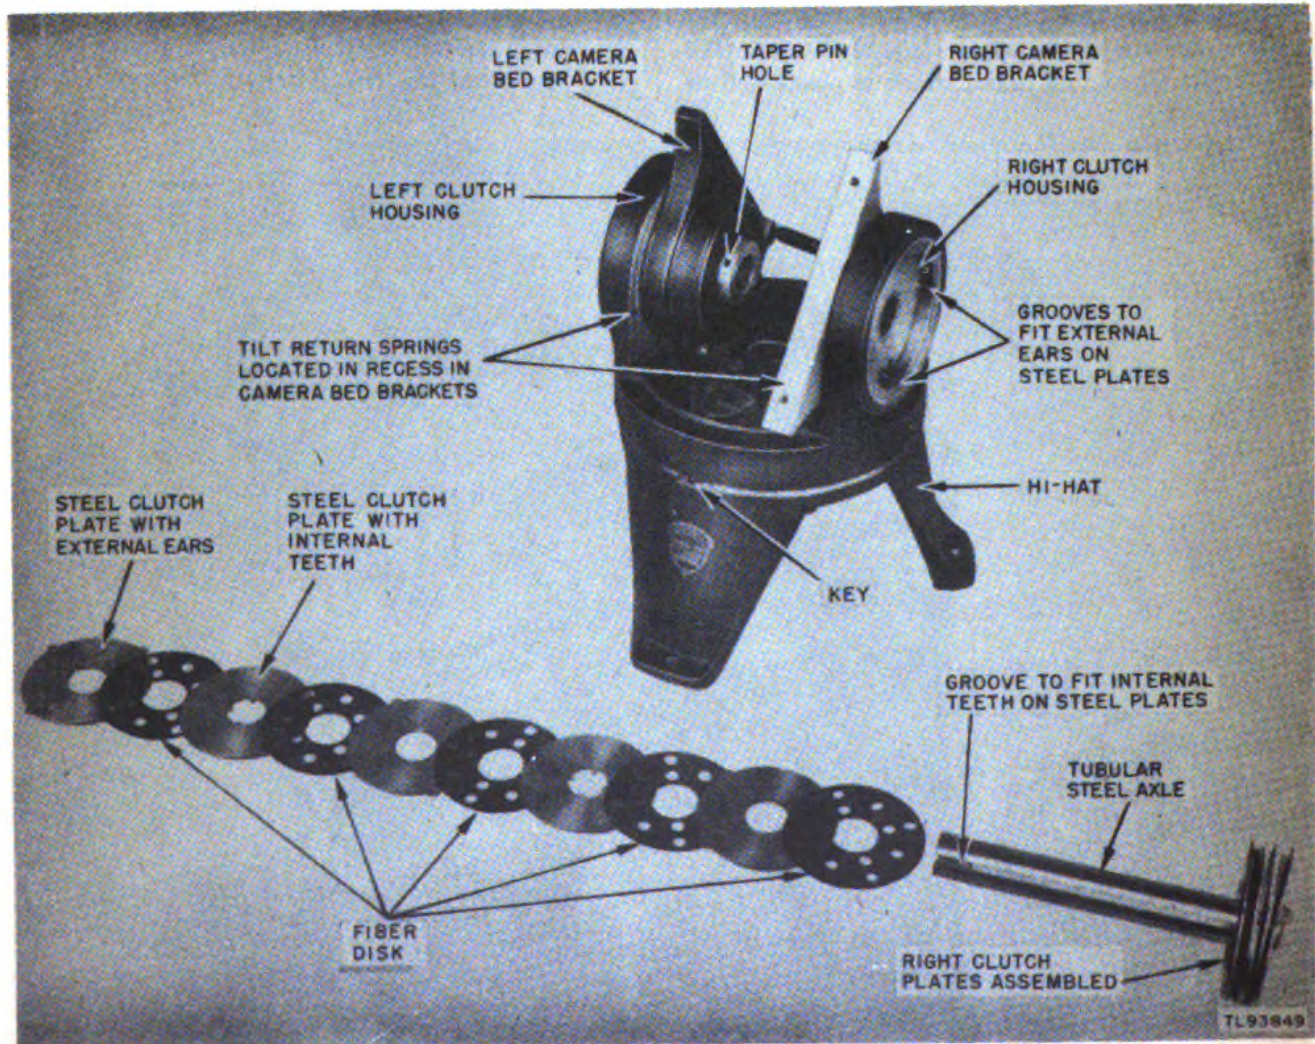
Tubular axle and clutch assemblies removed from tripod head assembly.
